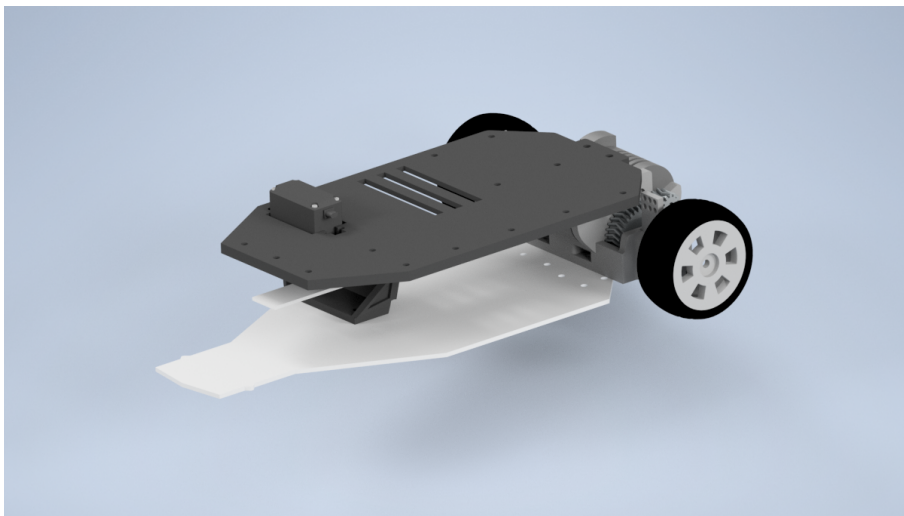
Rear assembly with motor mount, gearing system and plate.
